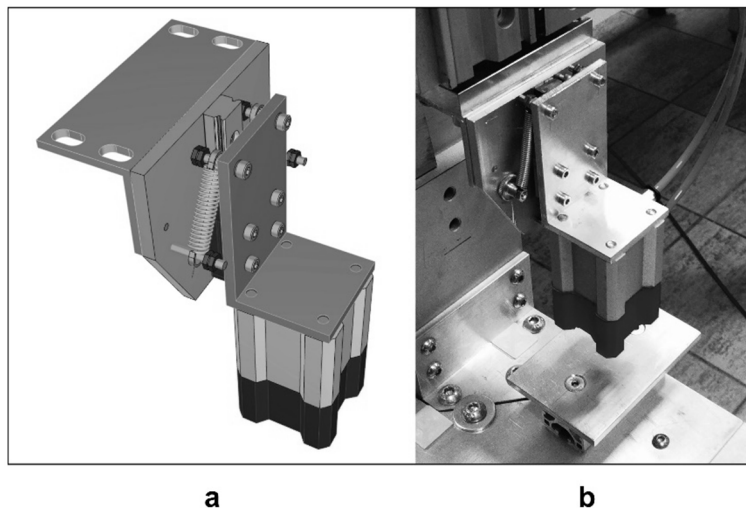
3D model of gripping effector assembly with compensator (a) and its real form (b)
